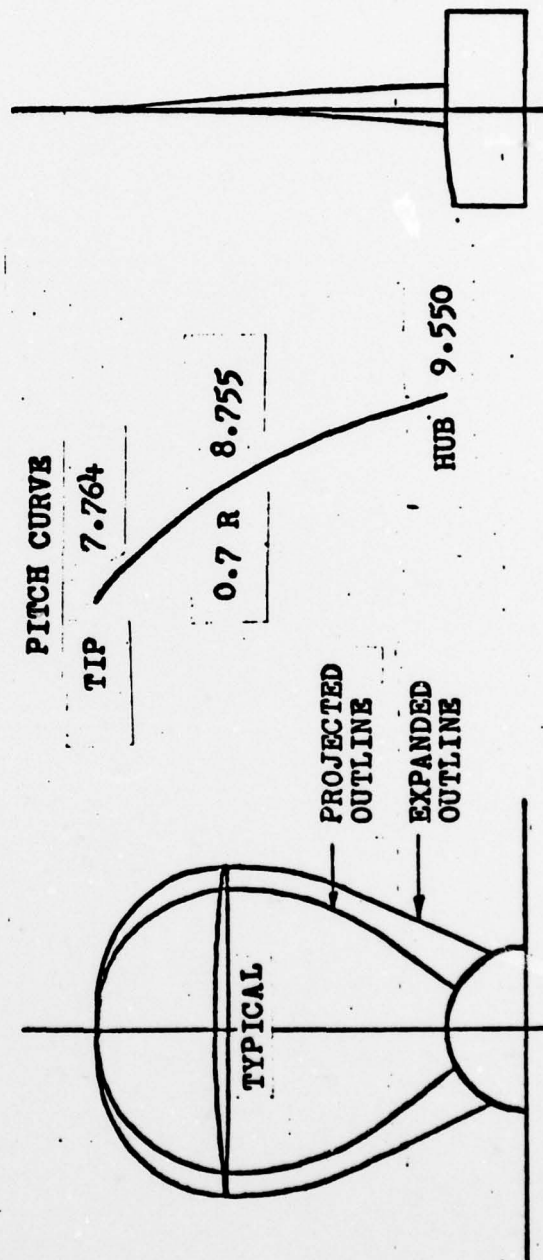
Propeller Drawings and Dimensions Representing Model Propellers 4415 and 4416
